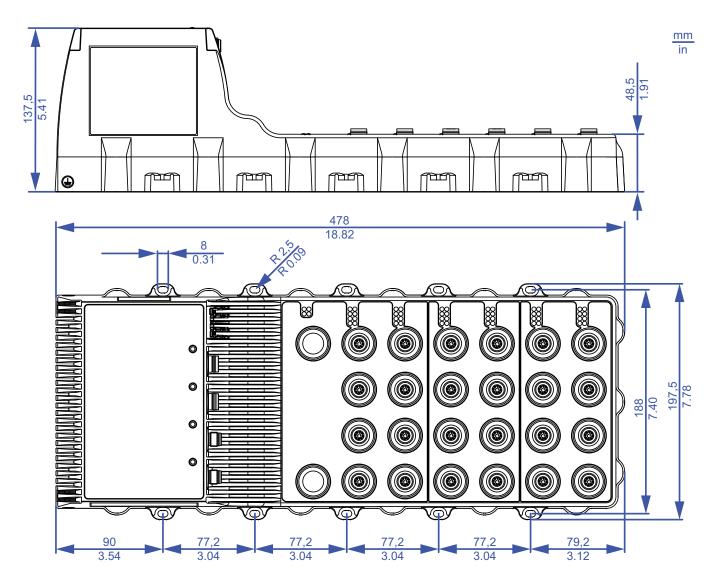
Dimension drawings: Device variants with 24 × 10/100/1000 Mbit/s twisted pair ports
